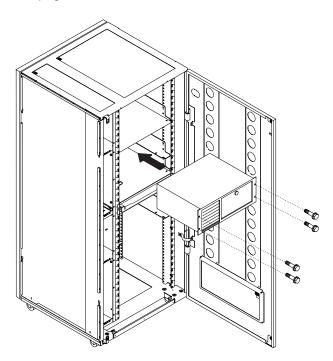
Installing the Service Processor Unit in the Controller Expansion (Front Side)
